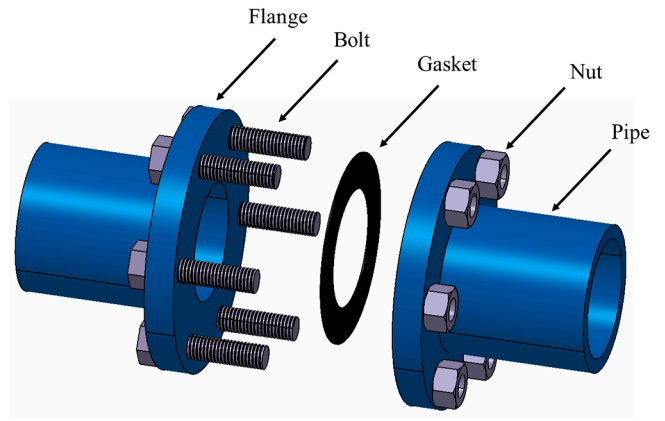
Schematic of a bolted flanged joint with a gasket placed between two flanges, and tightened by bolts.
